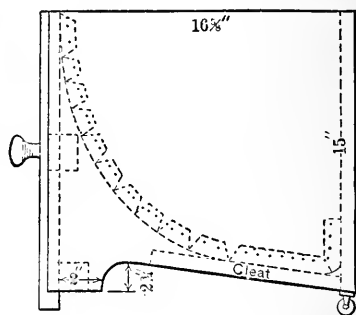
End View of Box, Showing Front Frame and Metal Bottom.
